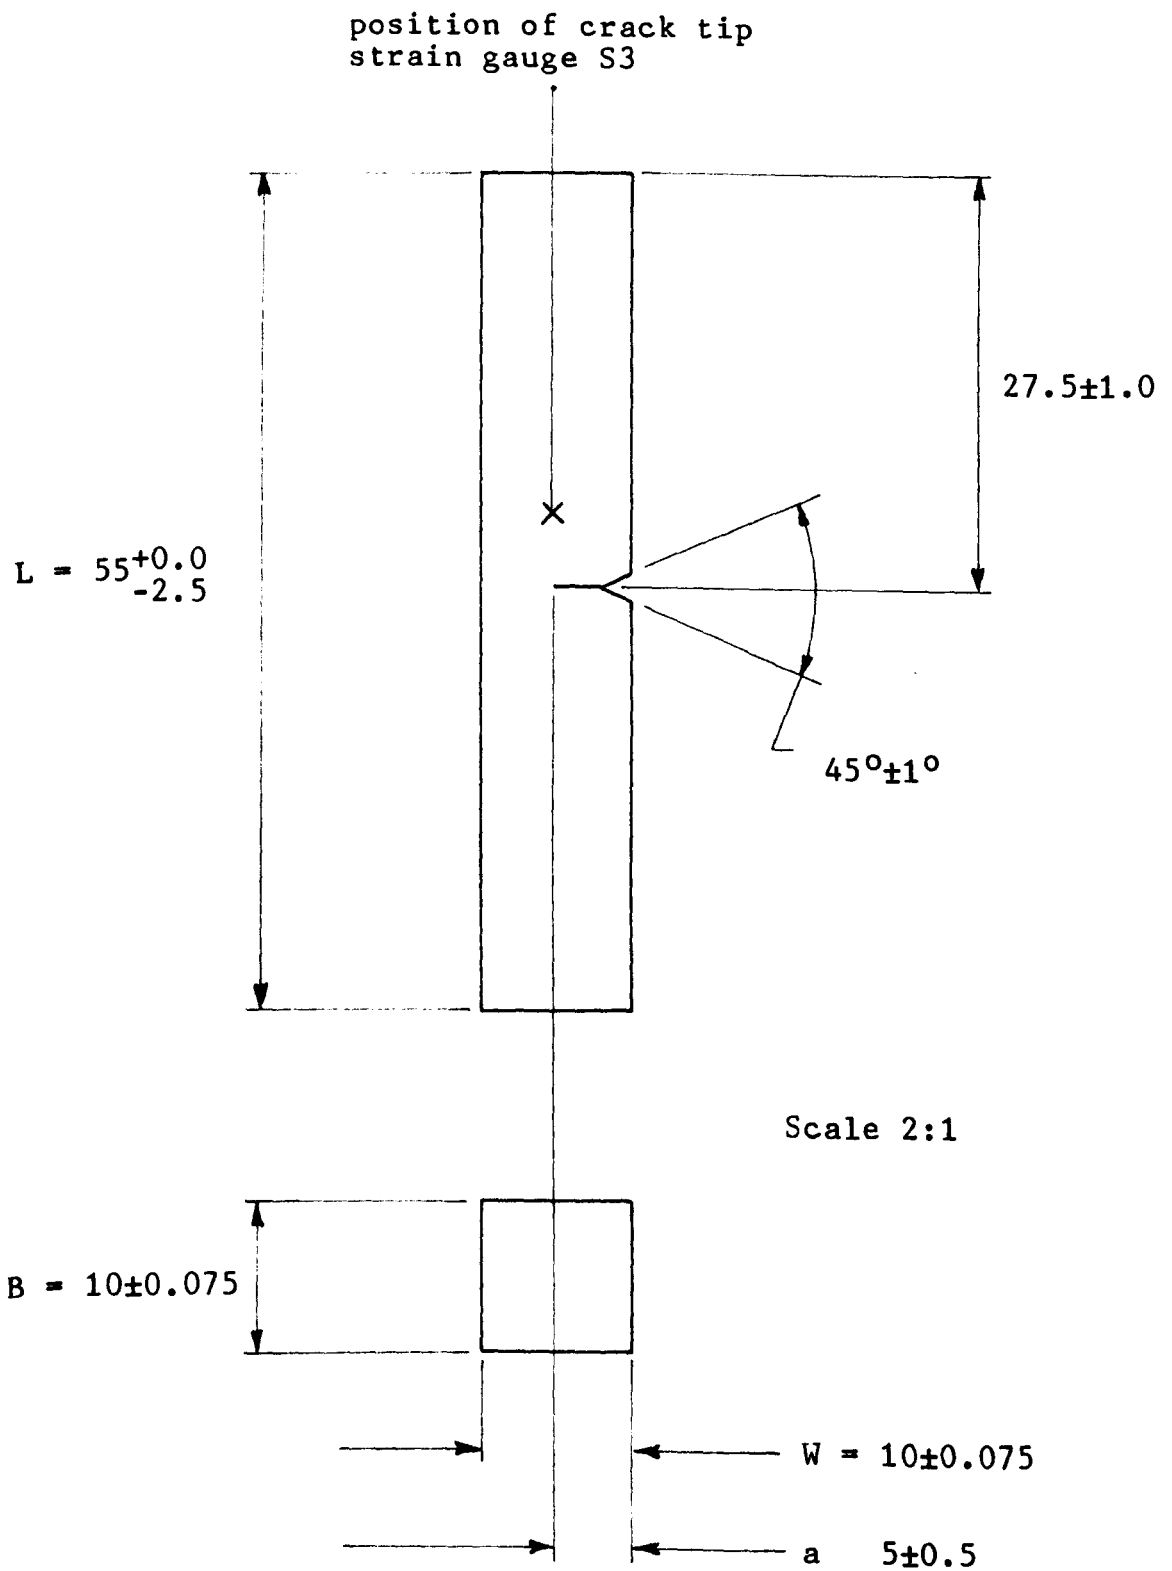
Charpy test specimen showing position of the crack tip strain gauge S3.
